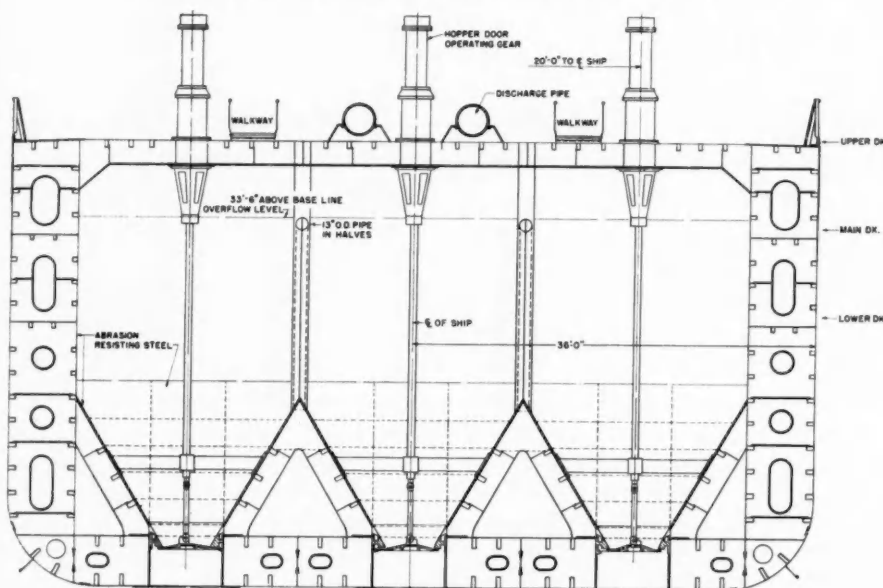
Dredge "Essayons"—section through hoppers, with plated upper deck.
